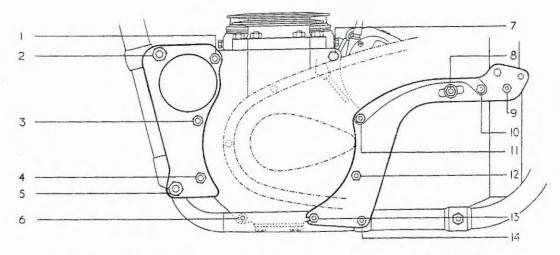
ENGINE PLATE-STUDS, BOLTS, NUTS AND WASHERS
